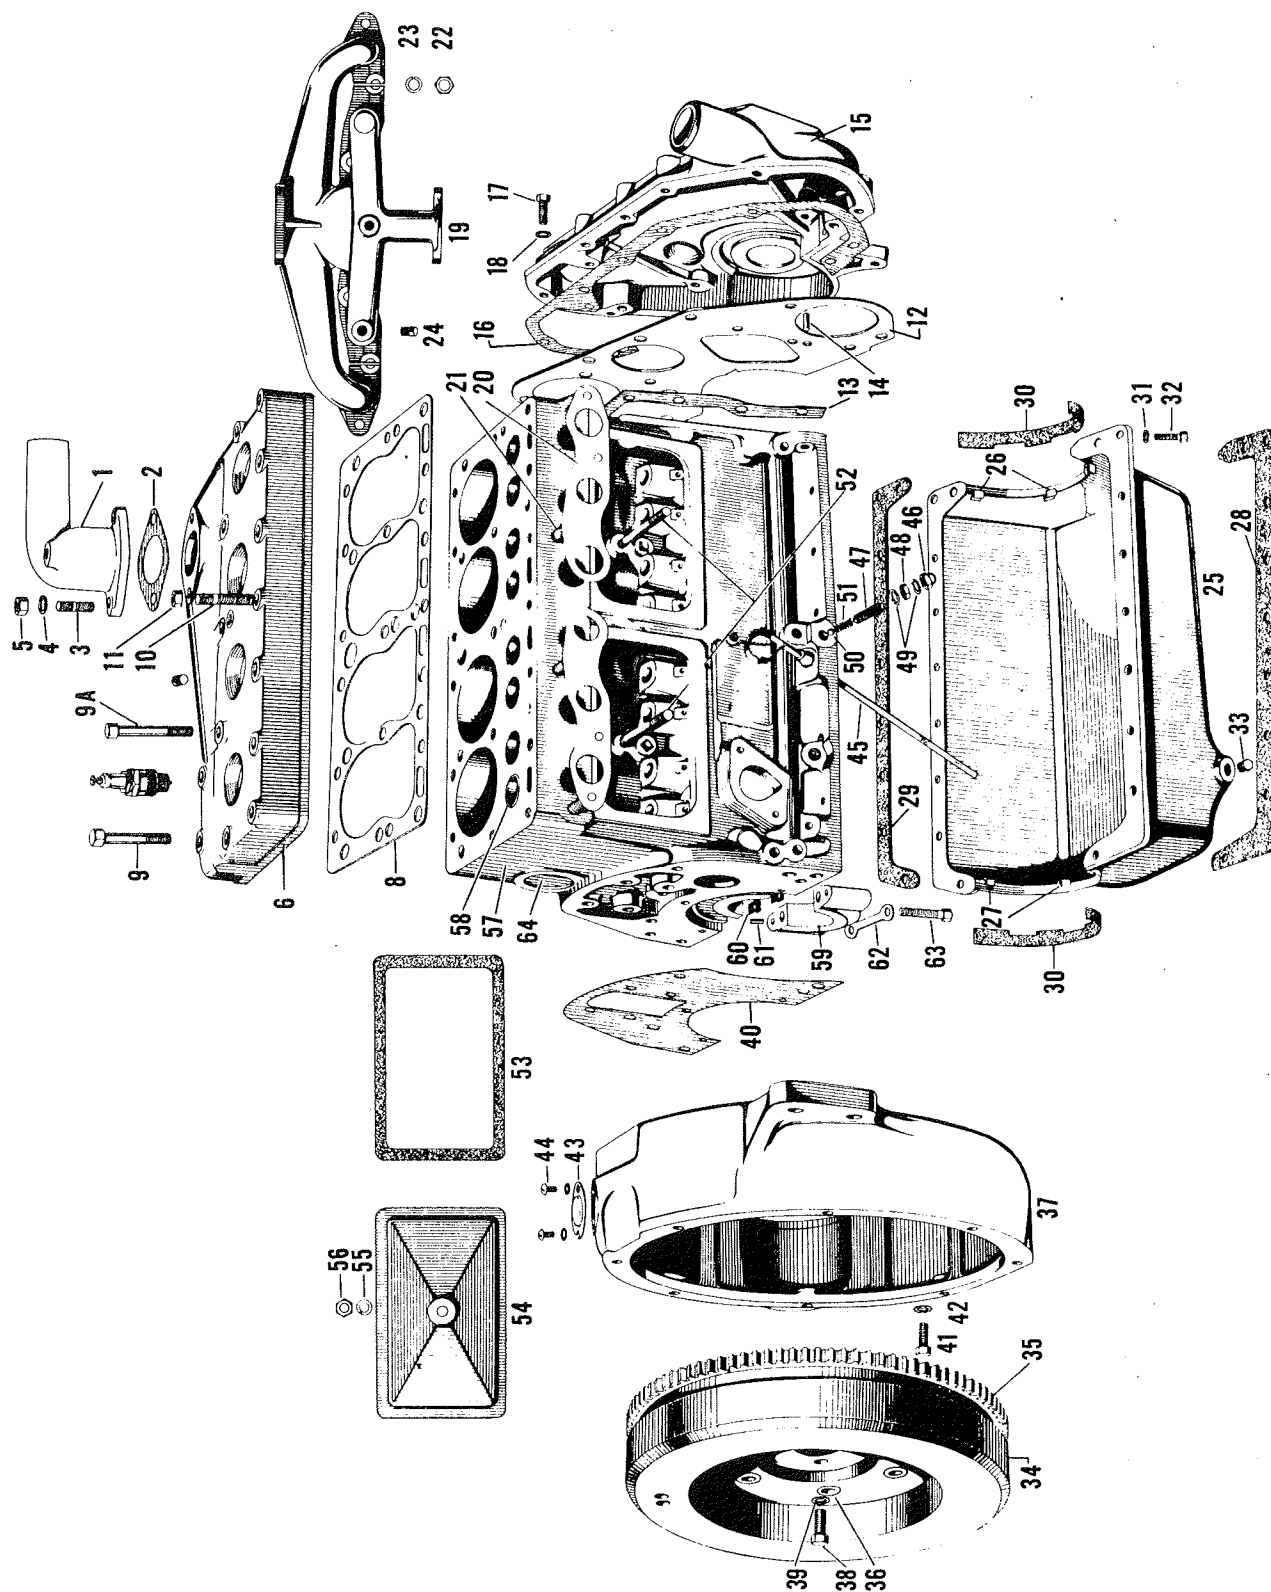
CRANK CASE, GEAR COVER, OIL PAN, CYLINDER HEAD, FLYWHEEL AND MANIFOLD PARTS
